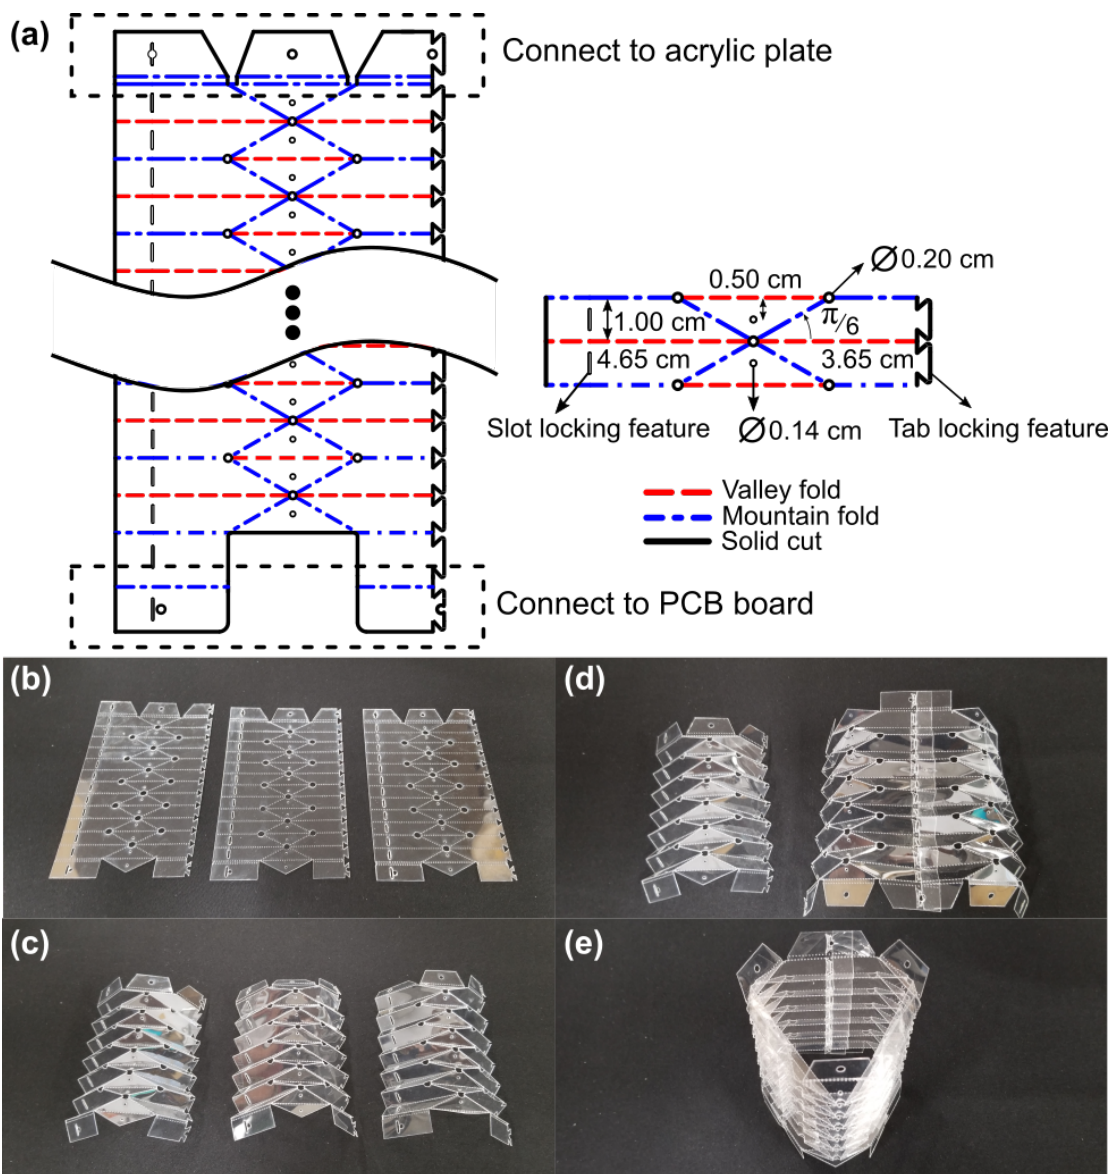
Details on the origami body fabrication. (a) Yoshimura crease pattern of the origami module with annotated dimension. (b) Perforated pattern on PET sheet engraved with laser cutter. The speed and power settings for the laser cutter are 100% and 6% respectively. The perforated pattern allows for ease of folding. (c) Folded origami sections required to construct the origami compliant body. (d) Two folded sections combined using the slot-tab locking feature. (e) Finished compliant origami body constructed from three folded sections.
